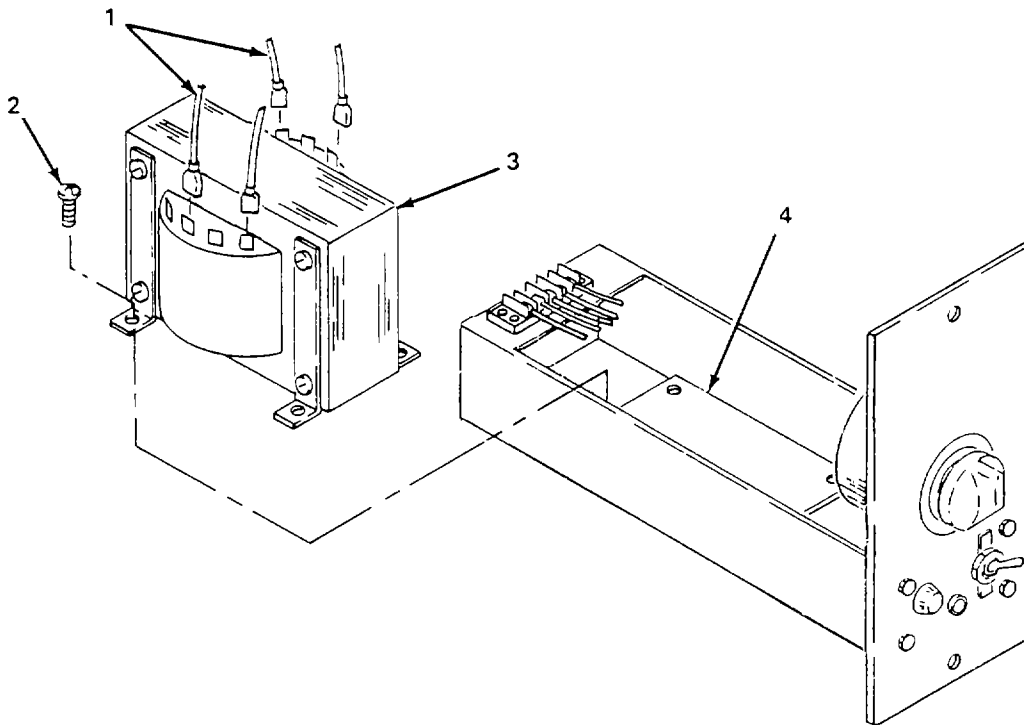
Single Light Power Supply (Outer Lock) Transformer, Replace.
